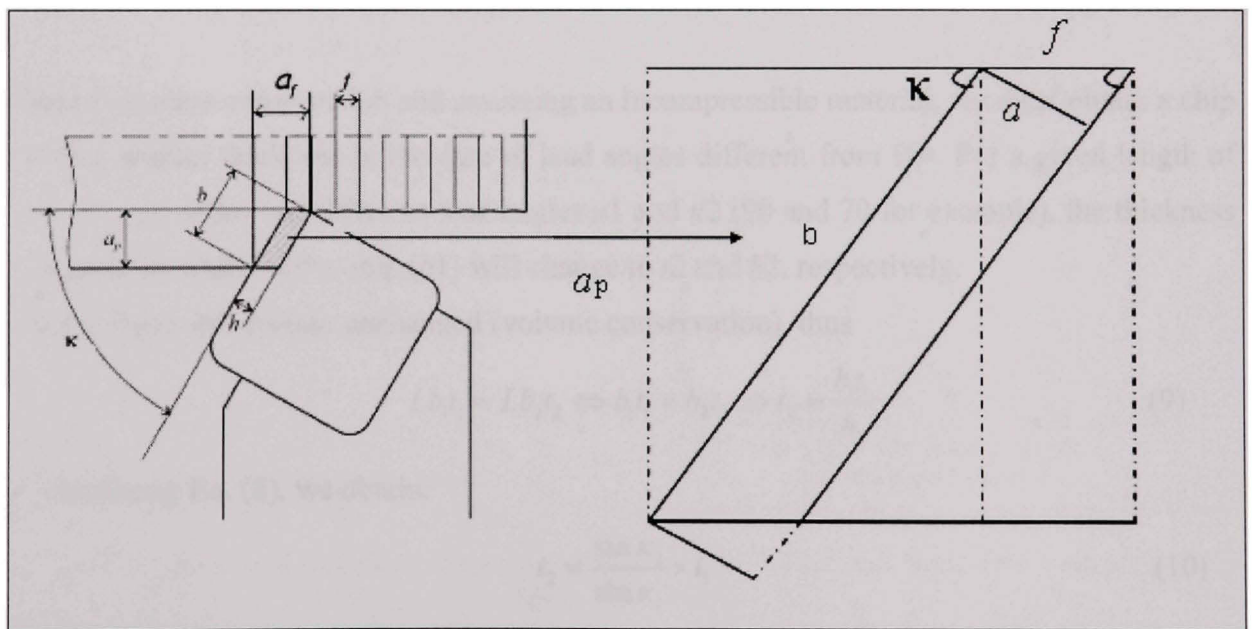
Schematic description of contact tool-piece during oblique cutting.
